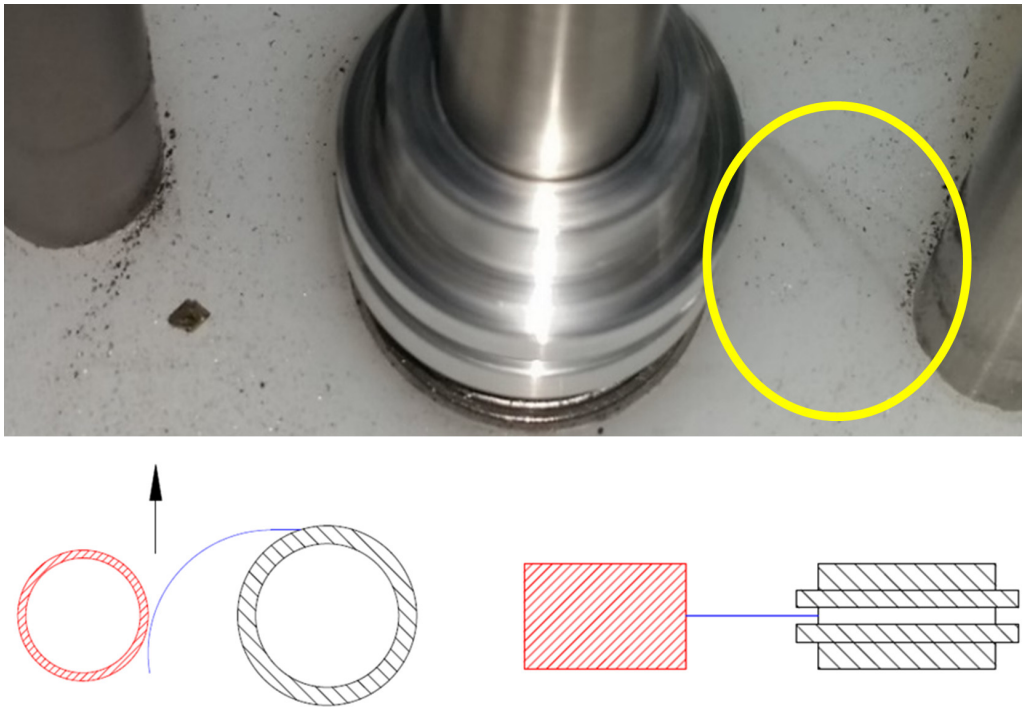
Equipment overview: visible pivot with clamped wire (yellow circle indicates movement) and two specimens [13, 14], schematic representation of the wire (blue), pivot (black), and test specimen (red) positions in the test equipment.
